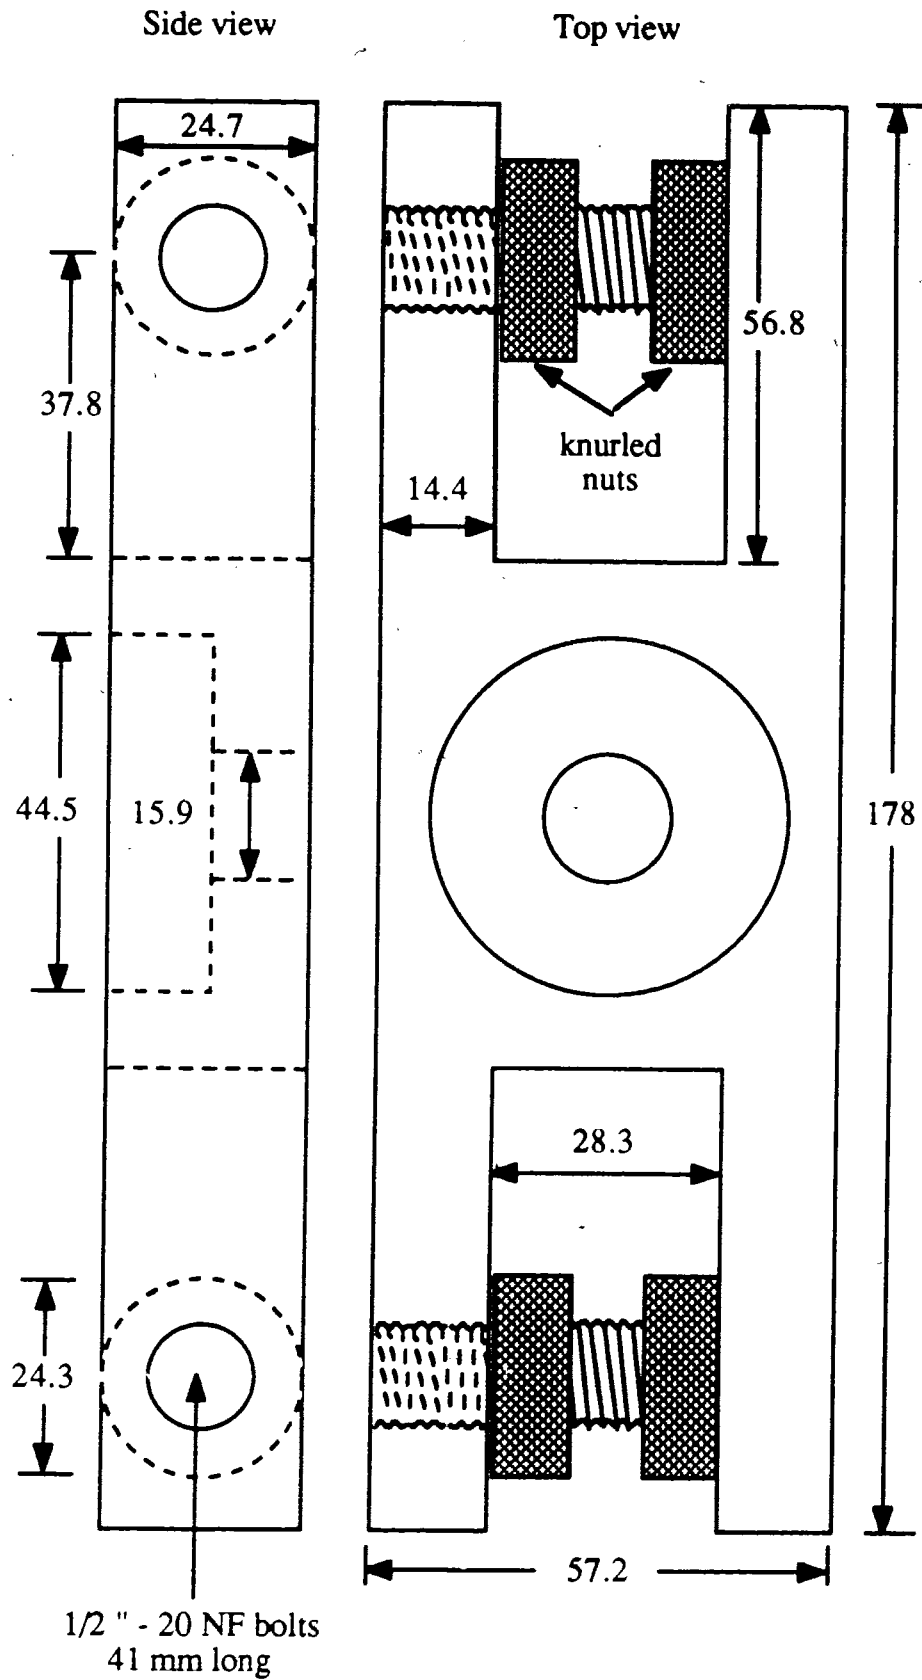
H - shaped plexiglas wedge (all dimensions are in mm)
